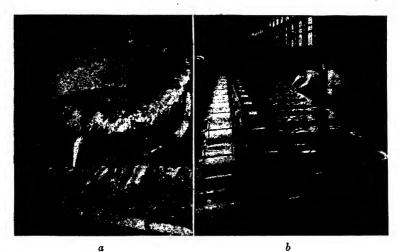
Aluminum production. (a) Pouring molten aluminum into pig molds; (b) rolling long sheets of aluminum. (Courtesy of the Aluminum Company of America.)
